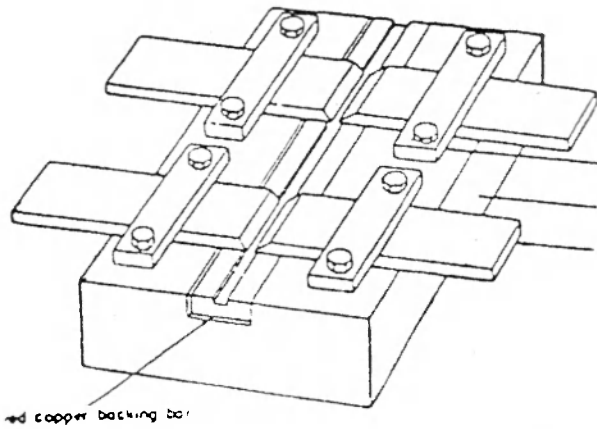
Diagram of jig used for restrained butt weld test
